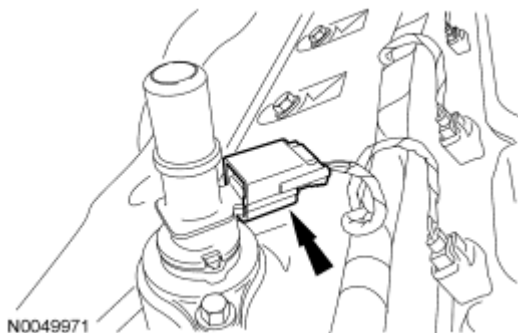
Locating Positive Crankcase Ventilation (PCV) Valve Electrical Connector
